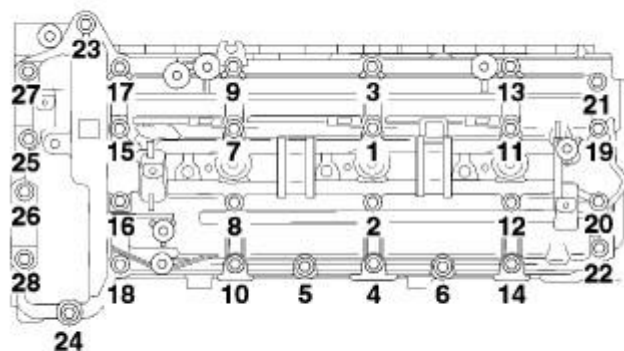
LEFT CYLINDER HEAD COVER TIGHTENING SEQUENCE
